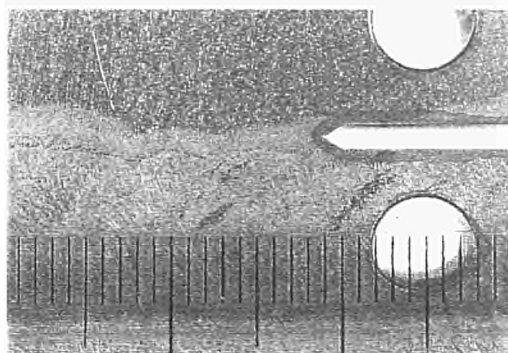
Novel test-pieces for testing creep crack growth of welds in steam pipes
